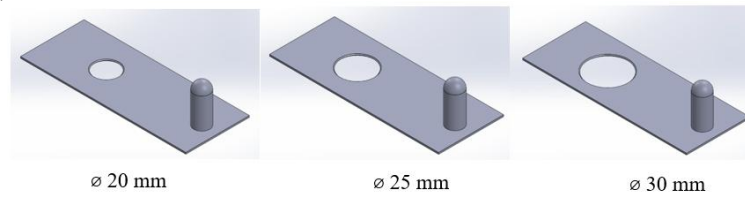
Cutter blade diameter variations (20 mm, 25 mm, and 30 mm)
